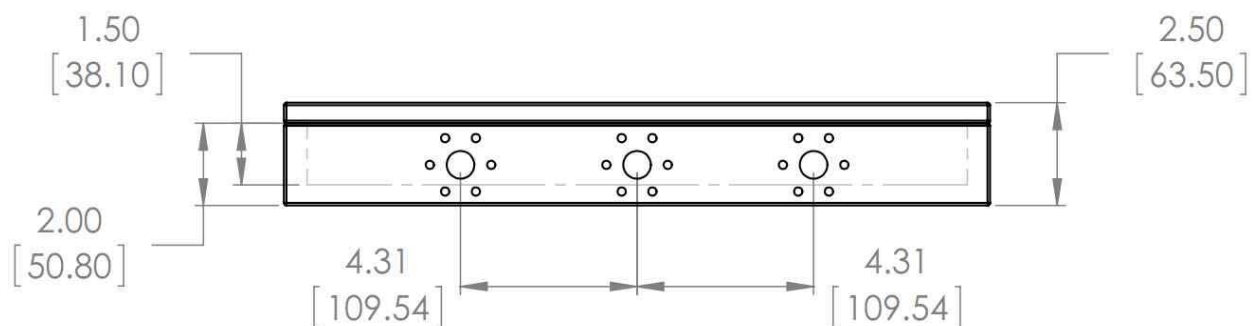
External and internal dimensions, side view, with glass lid, showing port spacing.
